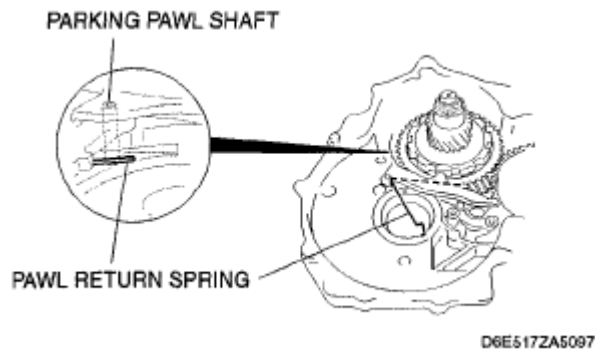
View Of Pawl Return Spring, Parking Pawl And Parking Pawl Shaft
